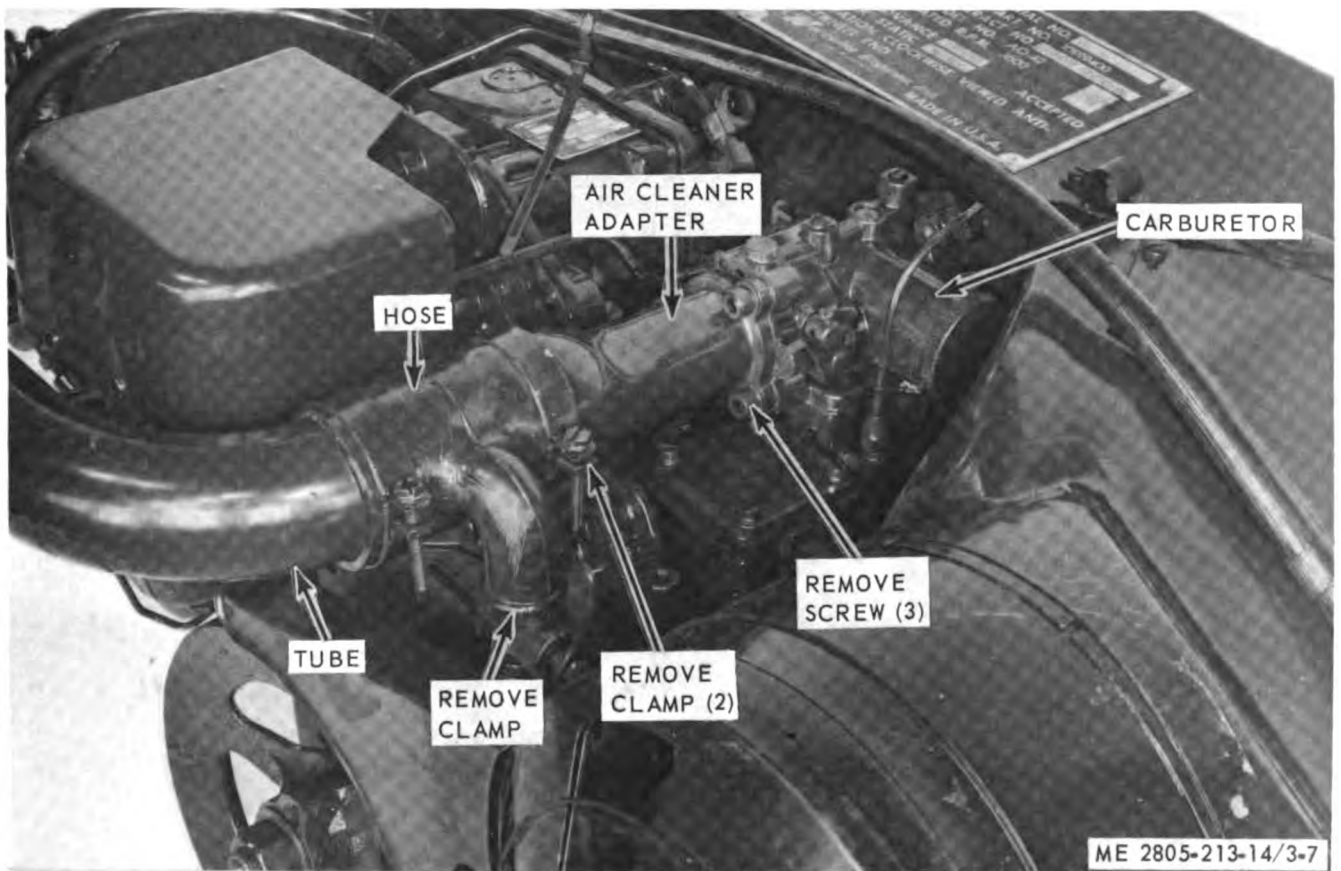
Air cleaner adapter and tube, removal and installation (Model AO4B-V).
